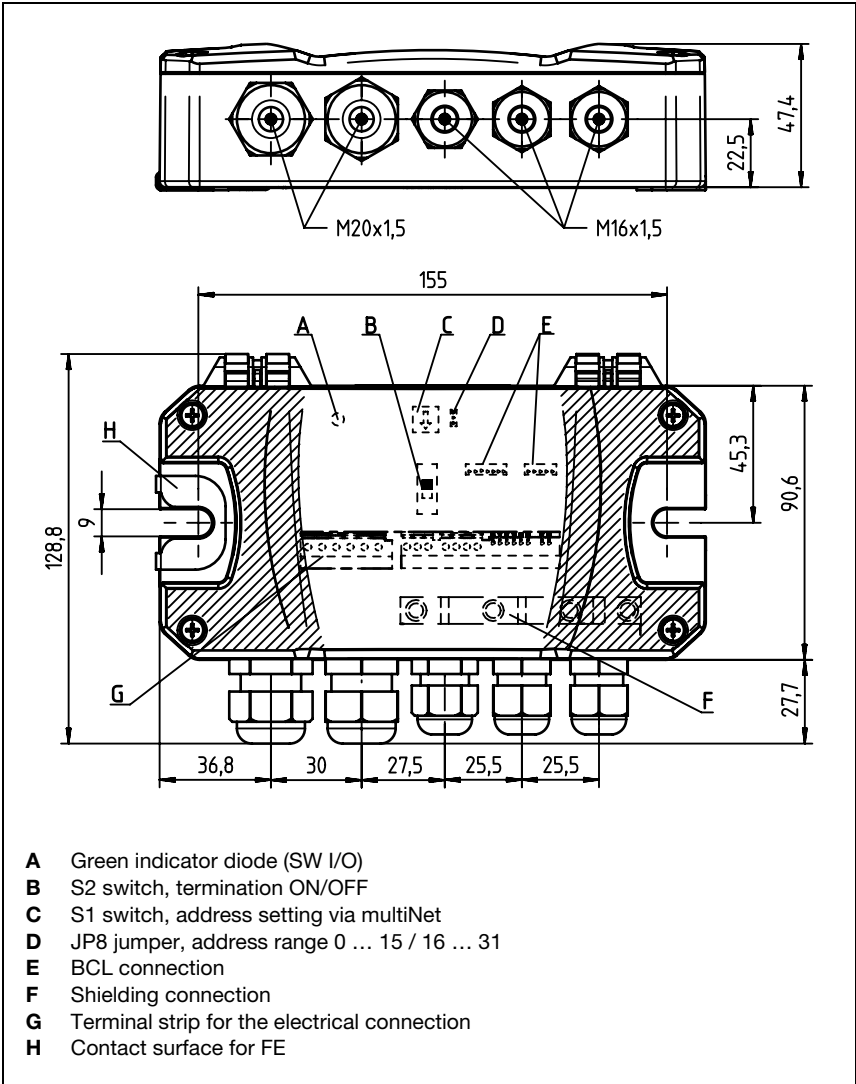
Dimensioned drawing of MA 100 terminal box
